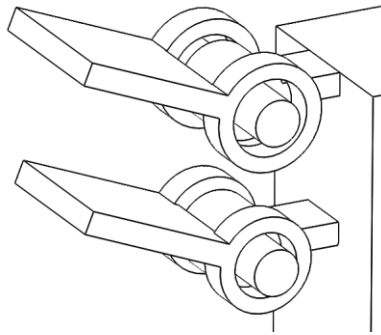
Hinge test part. The top hinge has a shaft offset of 1.0mm and the bottom hinge has a shaft offset of 0.6mm.
